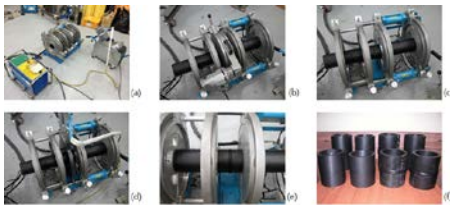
Butt fusion process. (a) butt fusion welding machine, (b) bring surfaces together and (c) machine surfaces and check the alignment, (d) apply pressure/temperature for butt fusion (e) cooling under pressure, (f) butt fused specimens.
